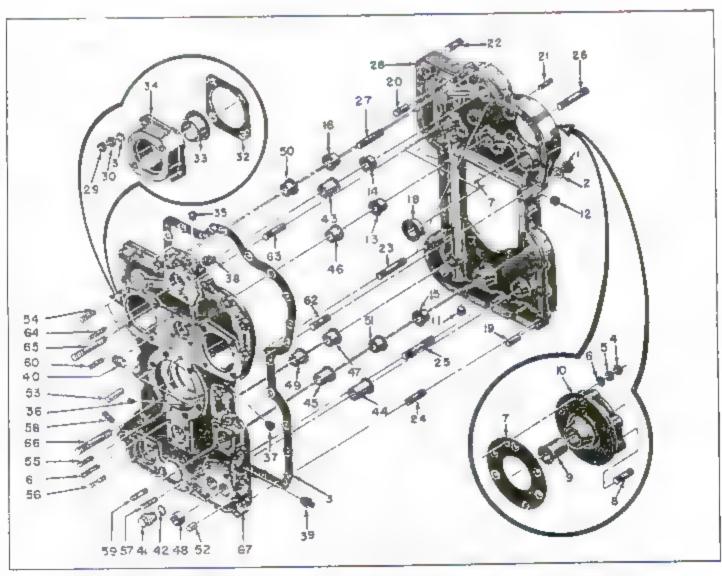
View of Accessory Case Front and Rear Machining Assembly (Sheet 2 of 2)
